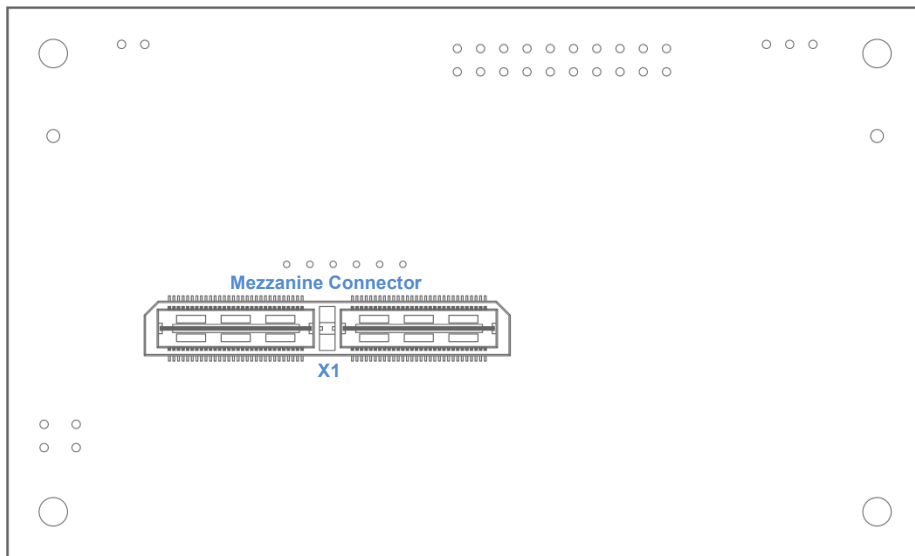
Apalis TK1 Mezzanine Board Connectors – Bottom Side
